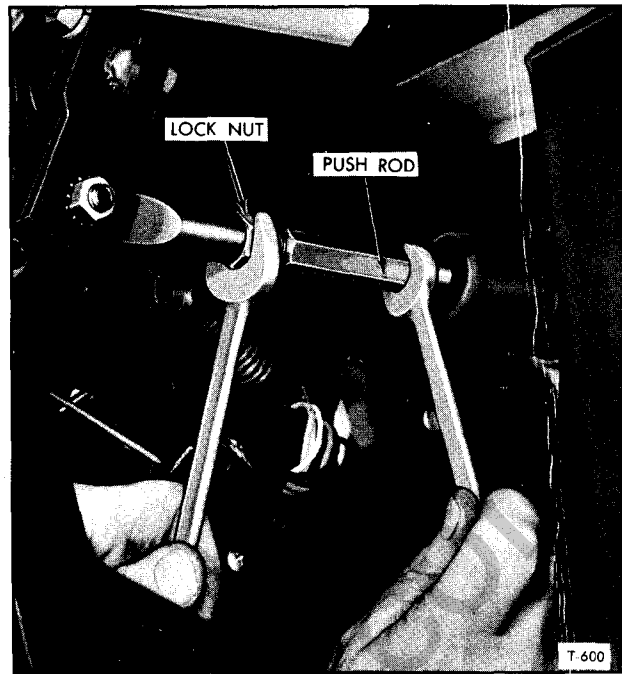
Adjusting Master Cylinder Push Rod (Conv. Cab Models and TM80) (Typical)
